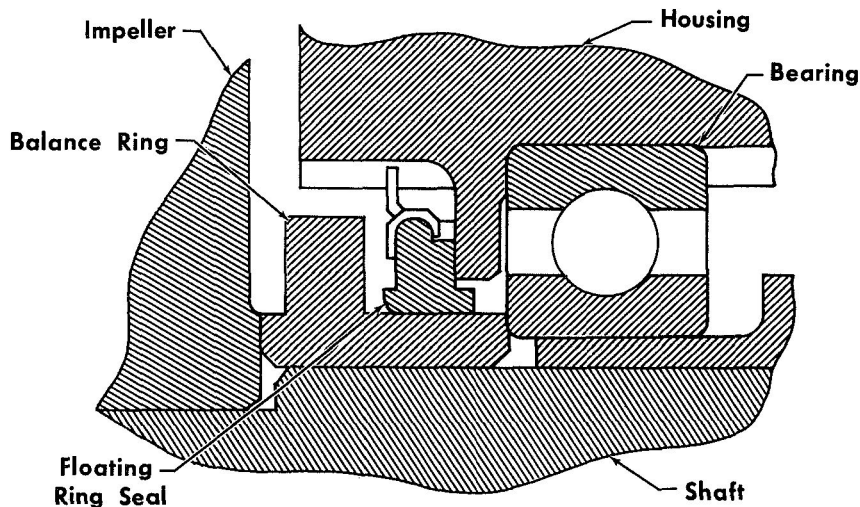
Oxidizer Bearing Upstream Shaft Seal
